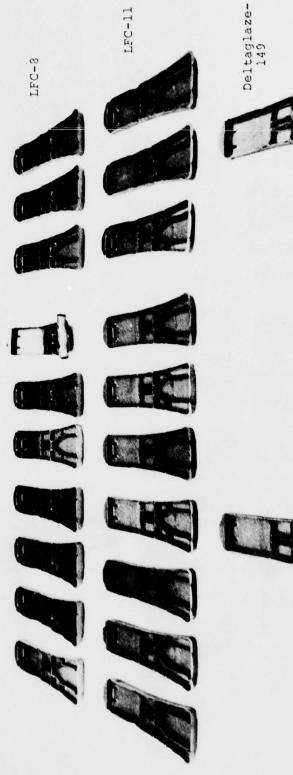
Closeup view of structural component forgings produced by isothermal forging at 1400F using three different lubricants
